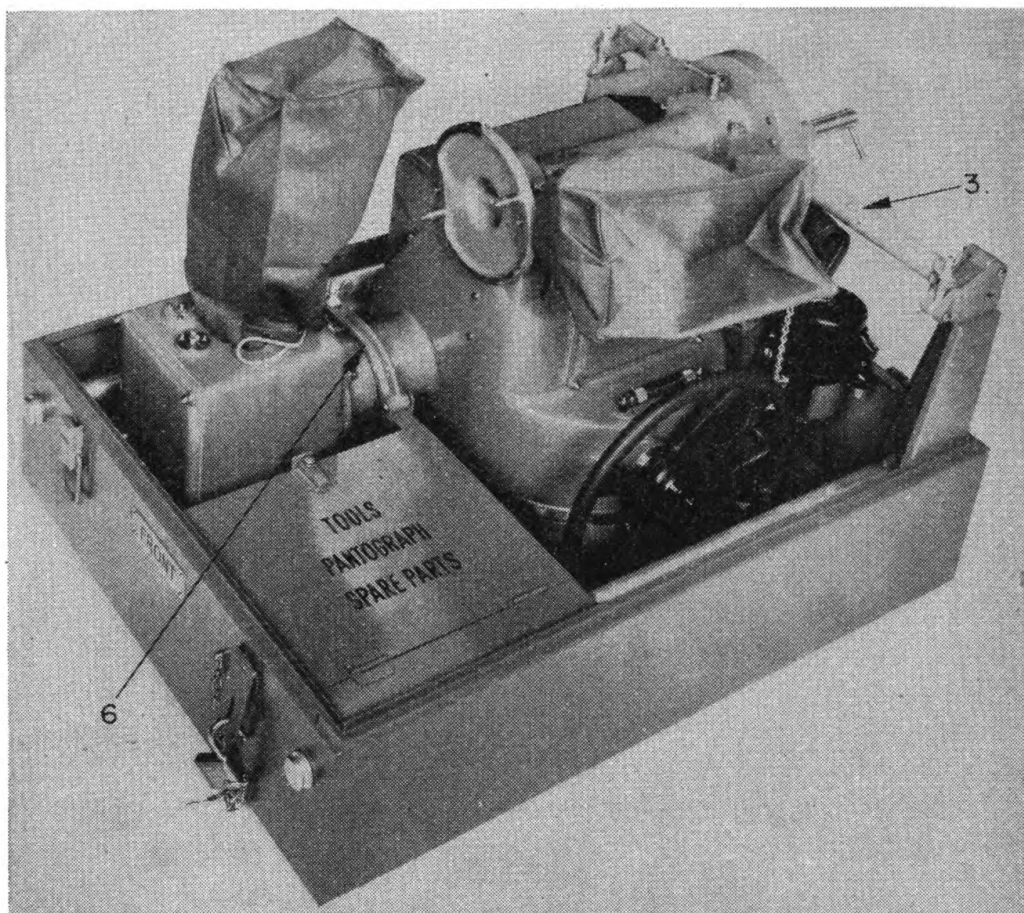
CORRECTOR ASSEMBLY IN STOWAGE BOX.
